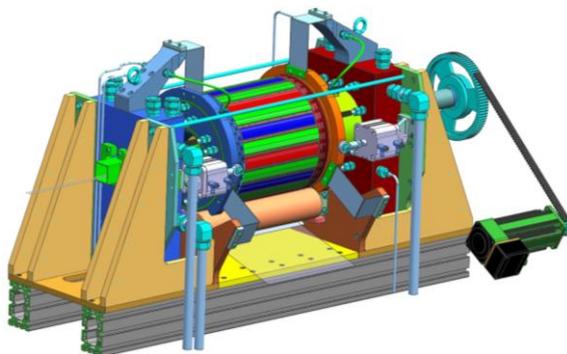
Prototype design of a spatial ALD roll-to-roll reactor with 300 mm diameter drum, which will be incorporated in a roll-to-roll line.
